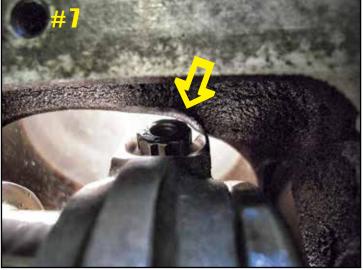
shows the amount of clearancing that I had to do to get adequate clearance at the bottom of the cylinder bore. Figures 7 and 8 show the before and after clearance of the rod bolt at the outside lower edge of the bore. It is clear that only a small amount of material had to be removed. It is also apparent that if the Scat rod did not have the ridge around the bolt head, even less material would need to be removed from the block. One option would be to grind the ridge down slightly. Another option would be to use one of the other two rods mentioned above, since they do not have this ridge around the bolt head.
